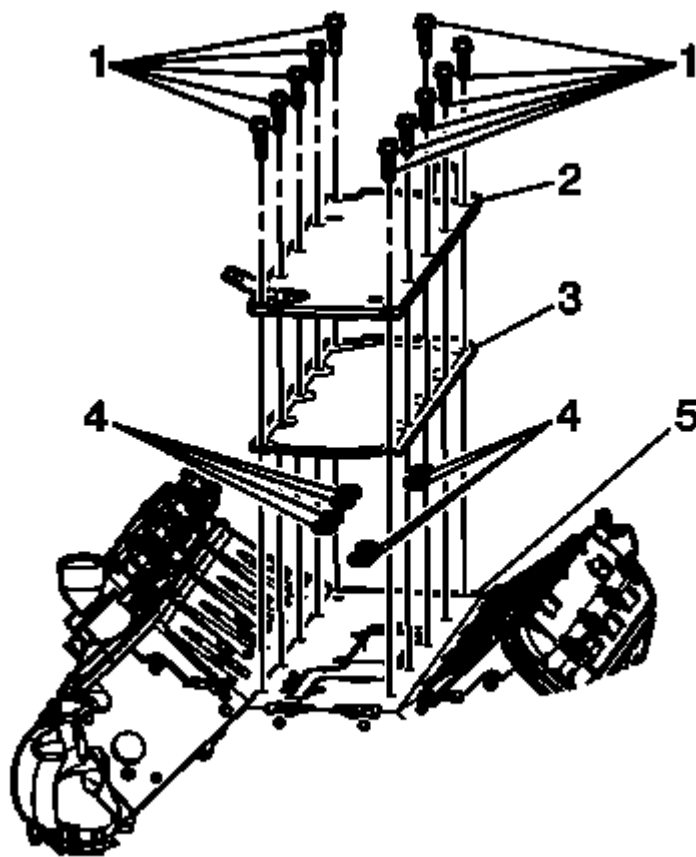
Engine Valley Cover, Retaining Bolts, Gasket & O-Rings
